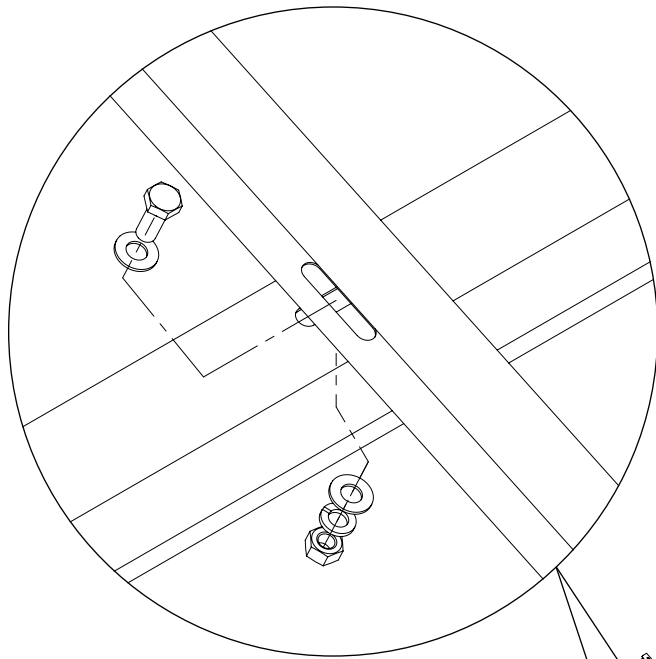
Screwing of the VM15H modular channel to the VN3H supporting channel using the G.1 VNZ bolt set
